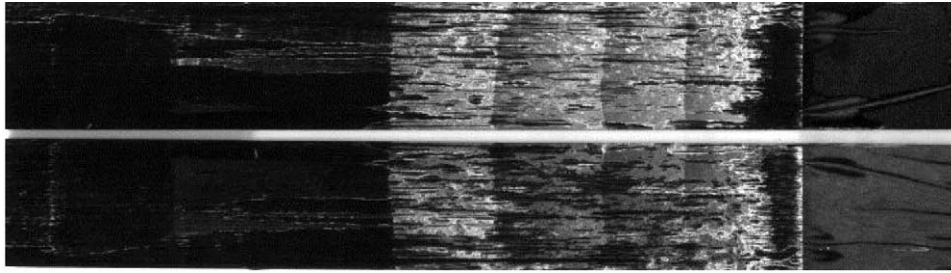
Fracture surfaces of sample tested at 90°C.
